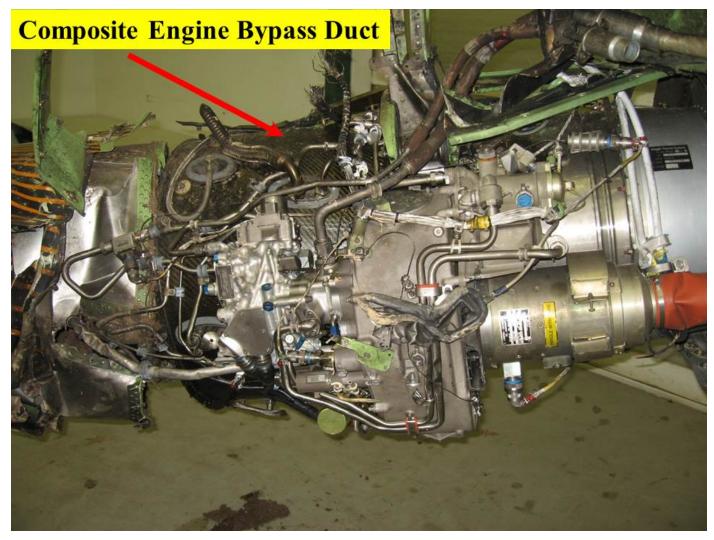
BOTTOM OF NO. 1 ENGINE - IMPACT DAMAGE BUT NO THERMAL DISTRESS
